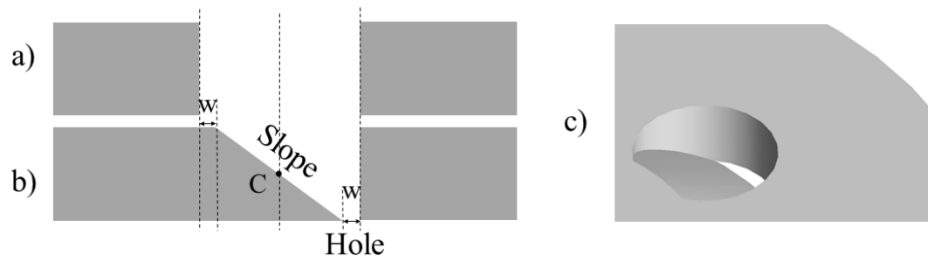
(a) cross section-view of a regular hole; (b) cross section-view of a slanted hole; (c) CAD representation of a slanted hole.
